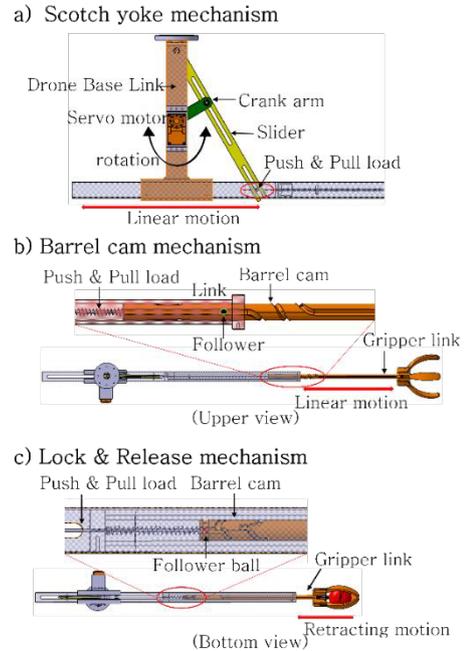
Mechanism of fruit harvesting with Scotch yoke mechanism and barrel cam [12]
